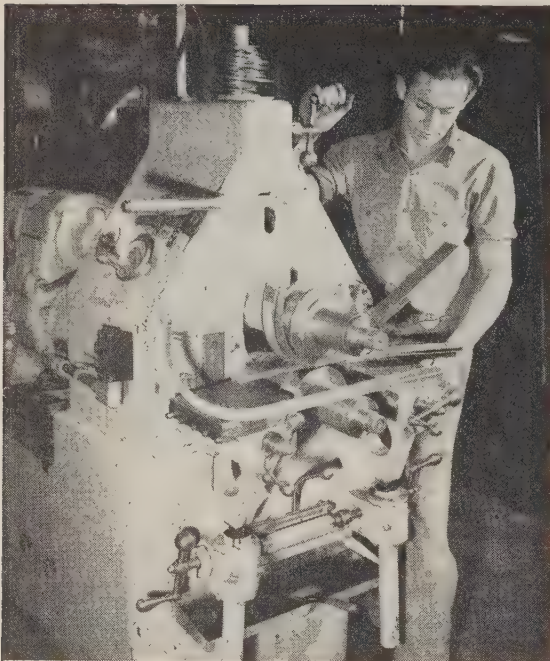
TYPICAL CONTOUR-FORMING MACHINE OPERATING ON PRINCIPLE OF SIMPLE BENDING
